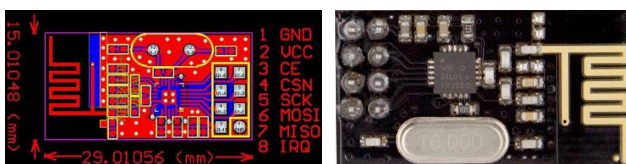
PCB layout and photograph of the nRF24L01+ module [5].
